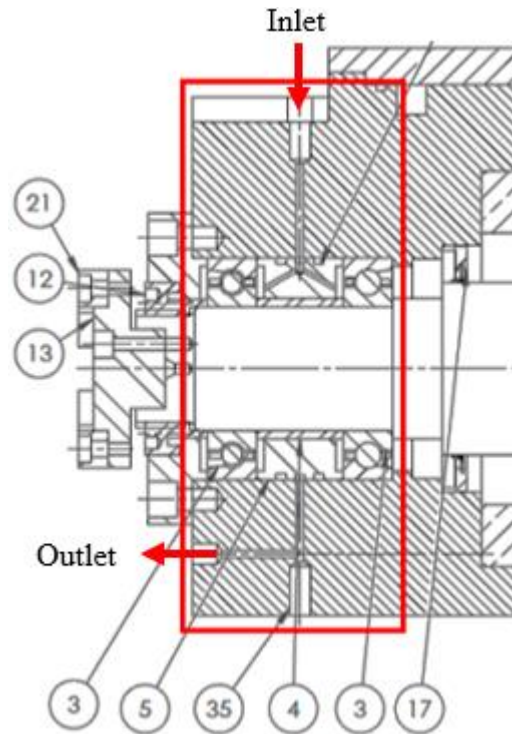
Complete Arrangement of the Front Bearing Lubrication System of the HSPM Generator
